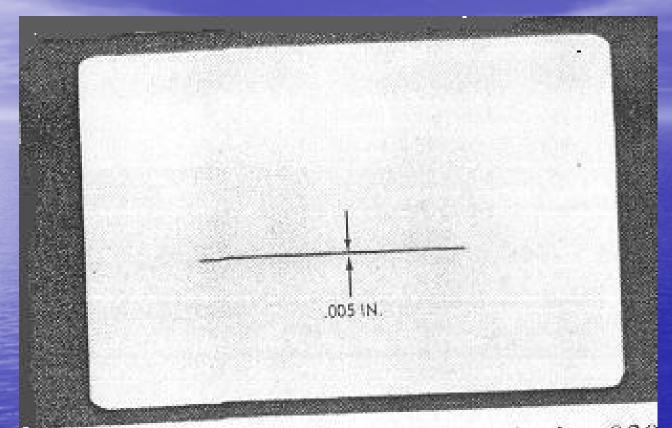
Slot cut at 24 in/min in .030 in. aluminum oxide wafer. (Courtesy, Hamilton Standard, Division of United Aircraft Corporation)
